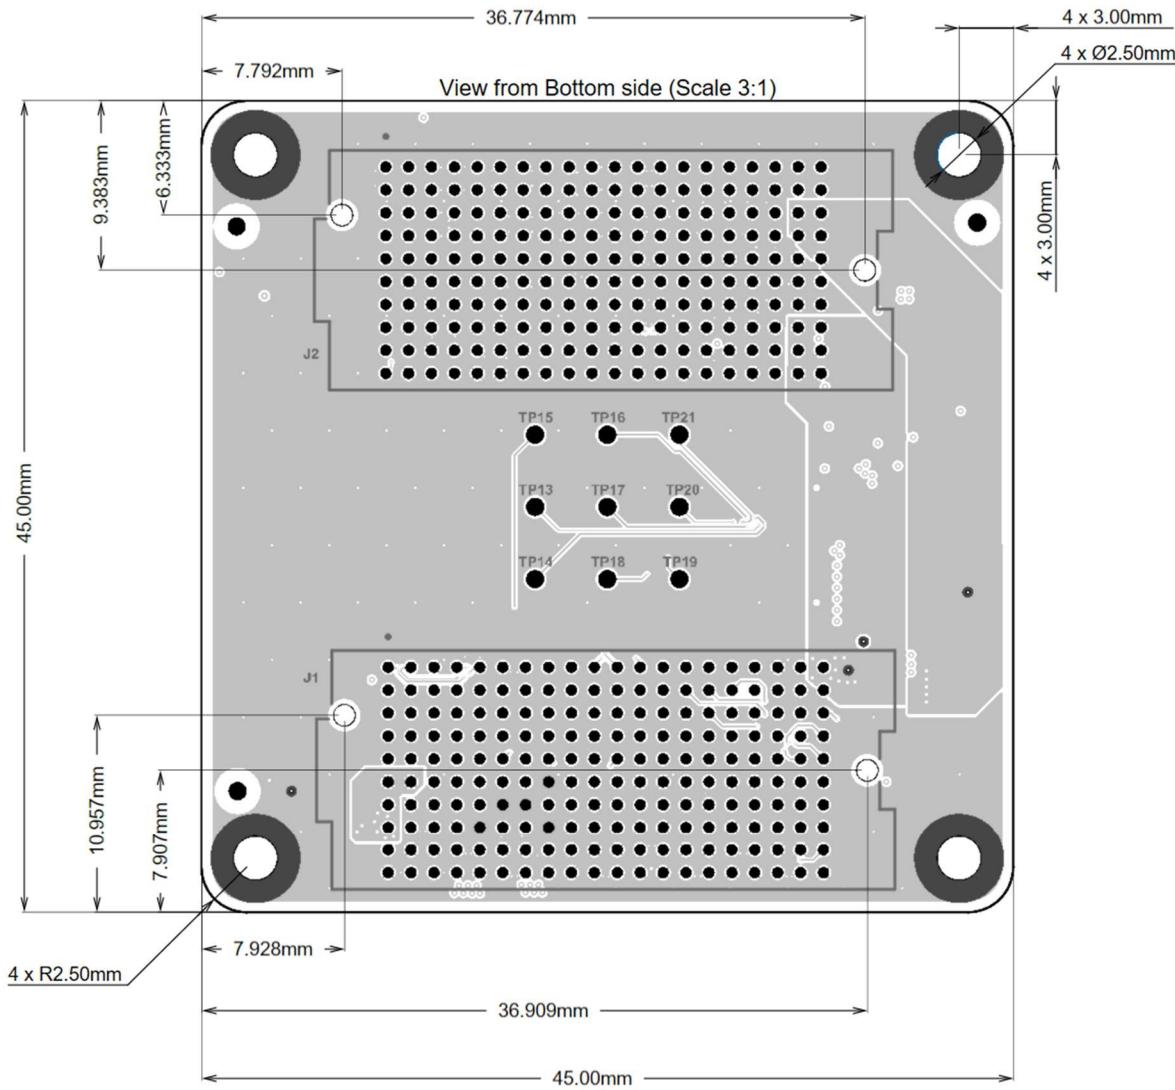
MitySOM-QC Mechanical Outline, View From Bottom
